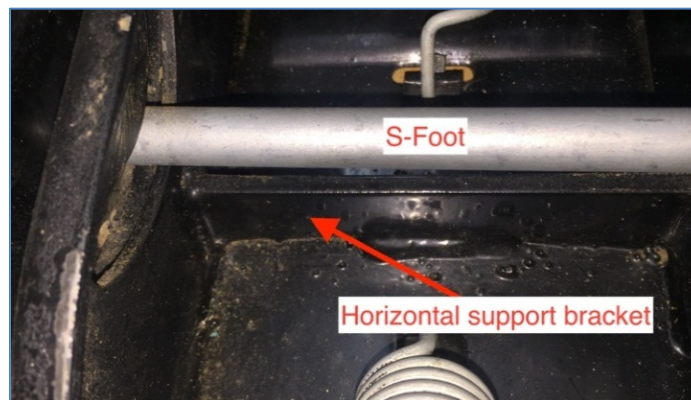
shows a close-up view of the horizontal stiffeners used in the S-foot HD and S-foot. The S-Foot HD uses two horizontal support brackets (5mm thick), which extend to the top of the
